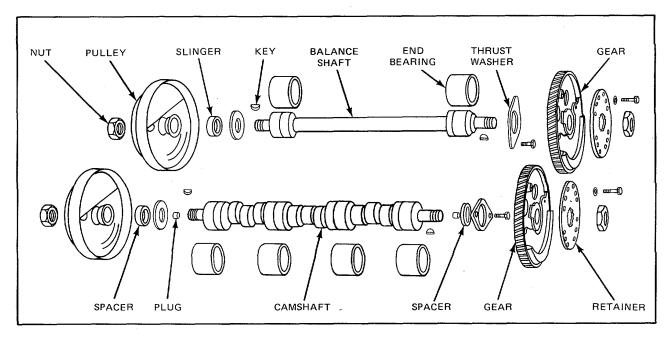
Camshaft and Balance Shaft Details and Relative Location of Parts
